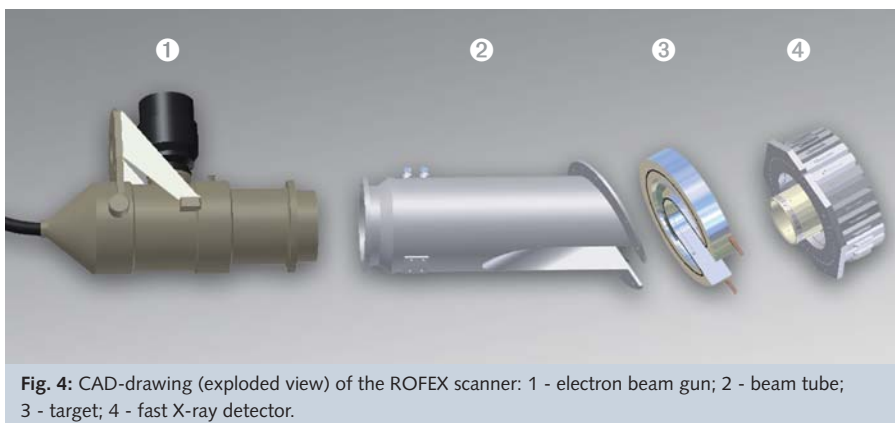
CAD-drawing (exploded view) of the ROFEX scanner: 1 - electron beam gun; 2 - beam tube; 3 - target; 4 - fast X-ray detector.
